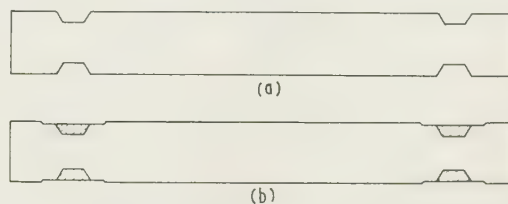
(a) Specimen before spraying. (b) Specimen after spraying and machining.
